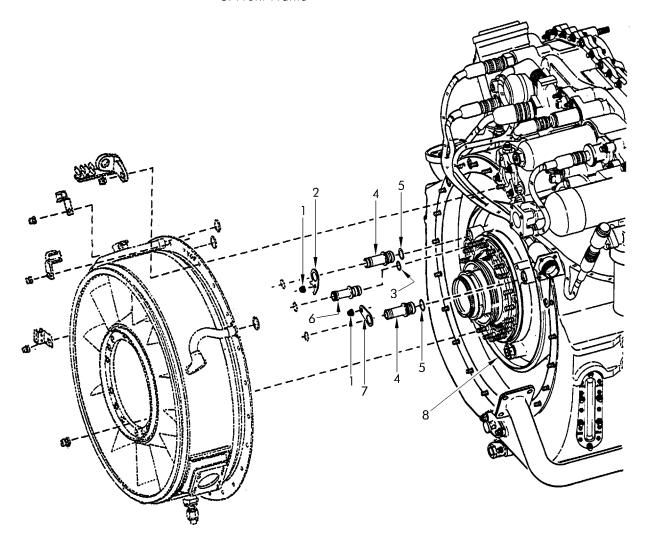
Oil Inlet and Scavenge Tubes; Removal, Inspection, and Installation
